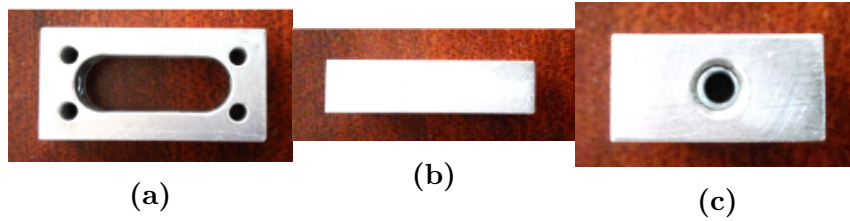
Three different views of the aluminium chamber: a) top view , b) front view and c) side view.
